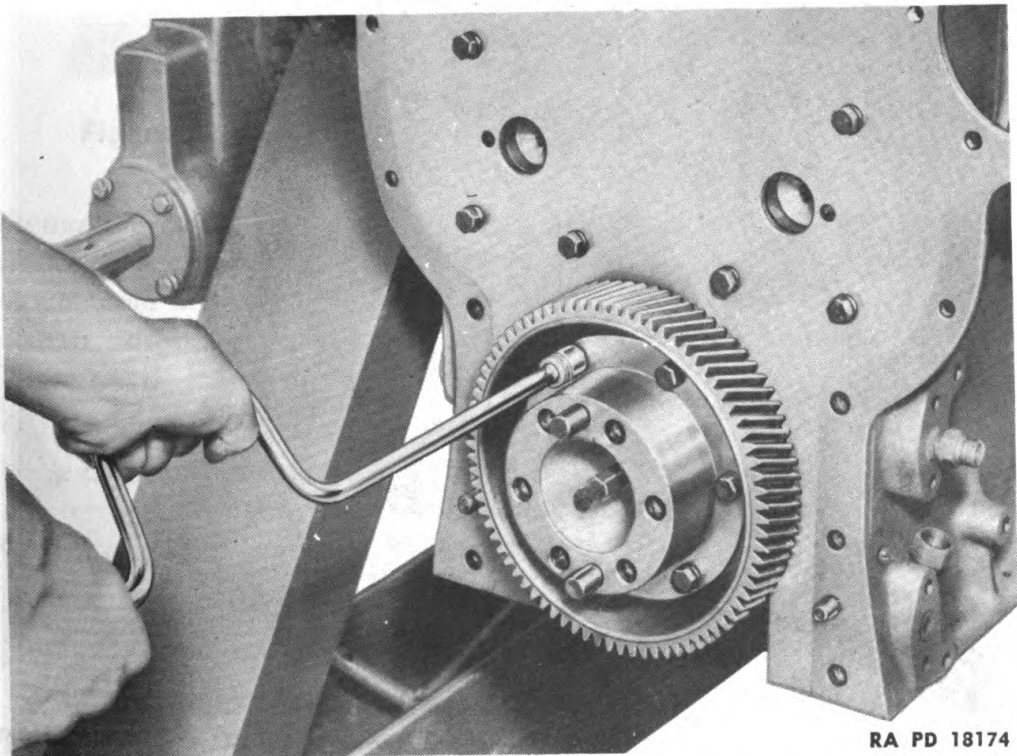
Removing Camshaft Assembly from Cylinder Block
